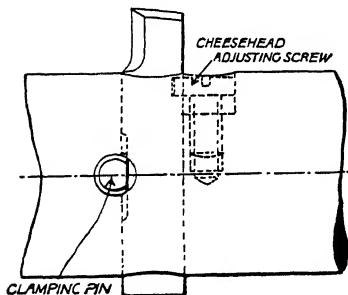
Single-ended Cutter adjusted with Cheese-head Adjusting Screw and Clamped with Tapered Pin
